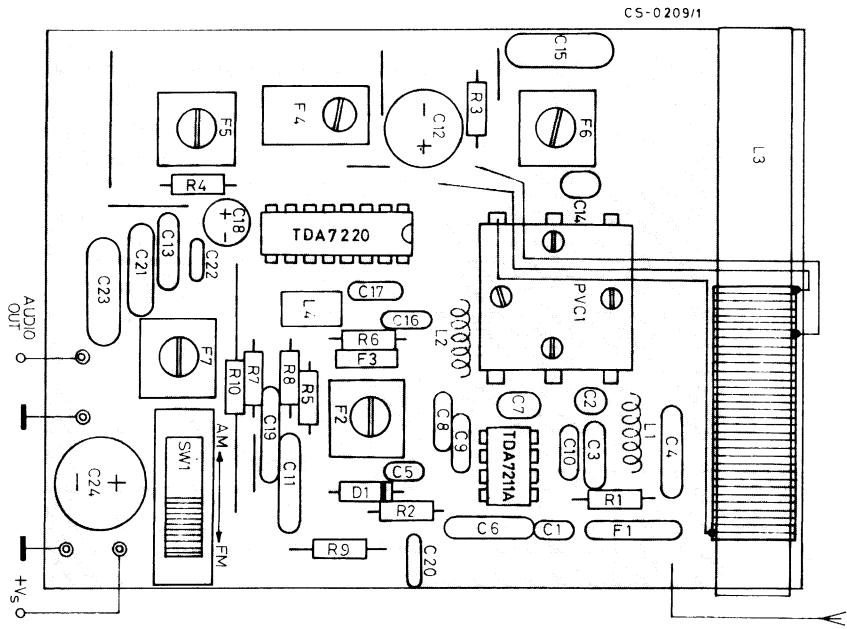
P.C. board and components layout of the circuit of fig. 3 (1:1 scale)
